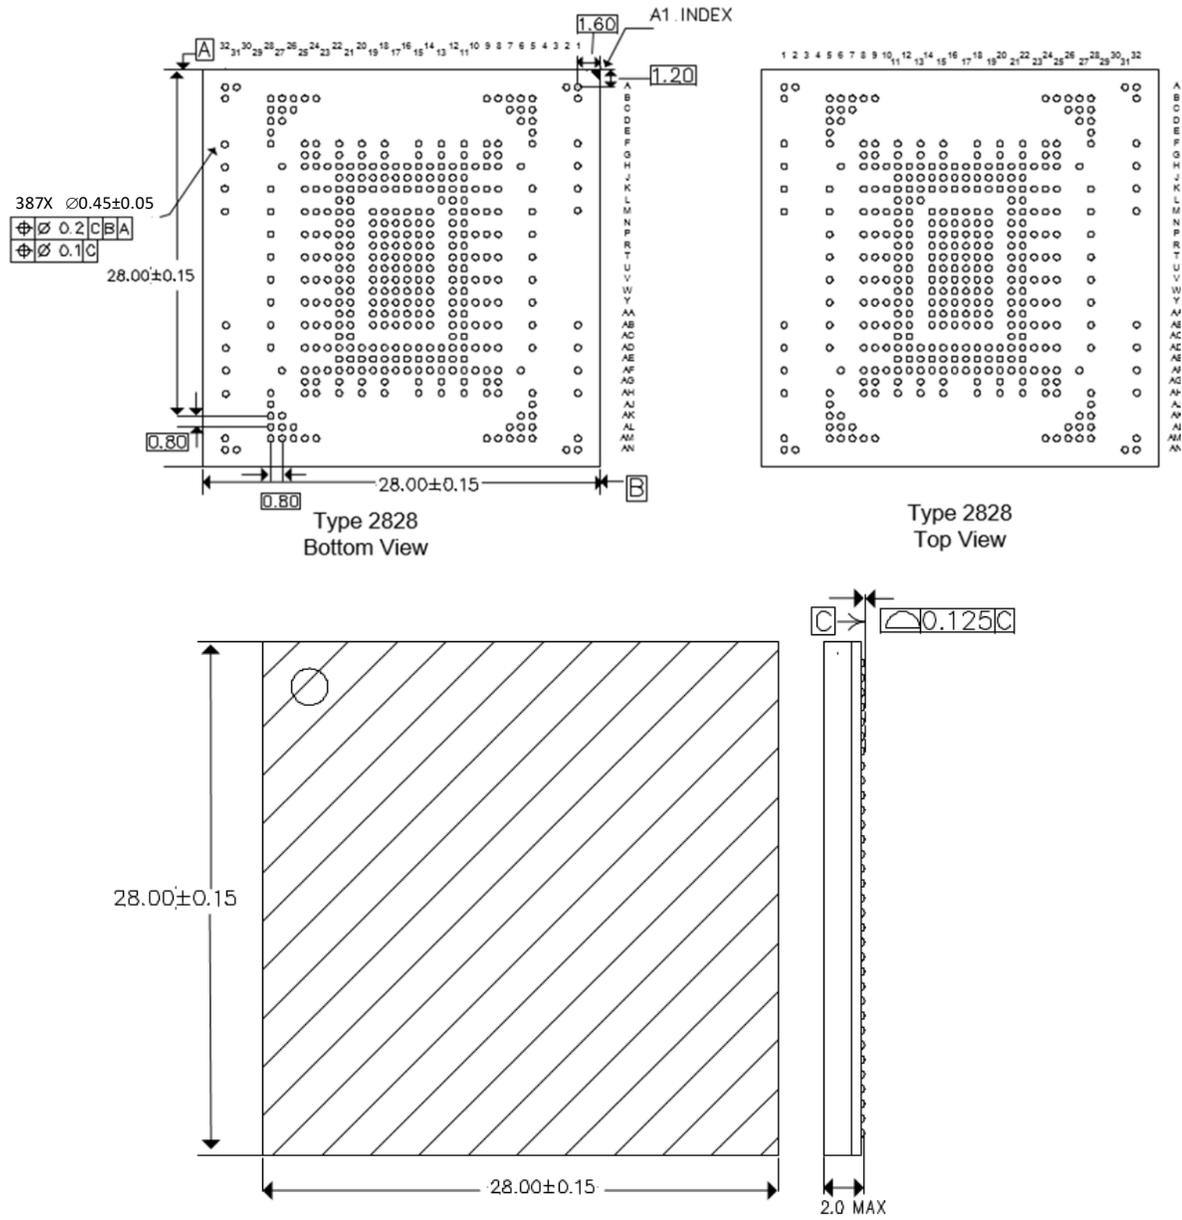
M.2 Type 2828-S5 Mechanical Outline Drawing Example
